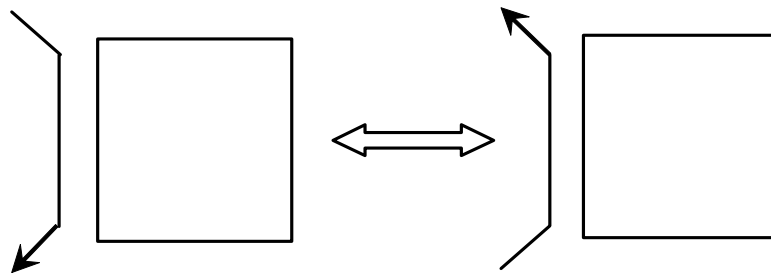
Multi-pass Underfill Dispensing Pattern
